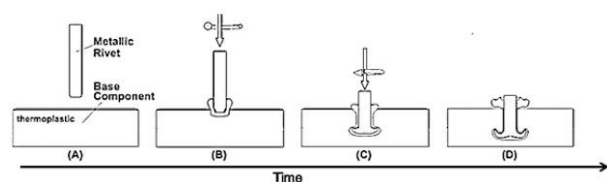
Friction riveting process: (A) positioning of joining partners ; (B) rivet insertion into the polymer; (C) rivet plastic deformation / forging; (D) joint consolidation, reproduced from [12].
